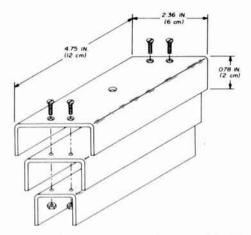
Method of constructing transistor heatsink. Aluminum sheet is formed to approximate dimensions shown, then assembled. Hardware is 4-40 (M3). Top holes are countersunk. Transistor stud clearance is drilled after assembly.
